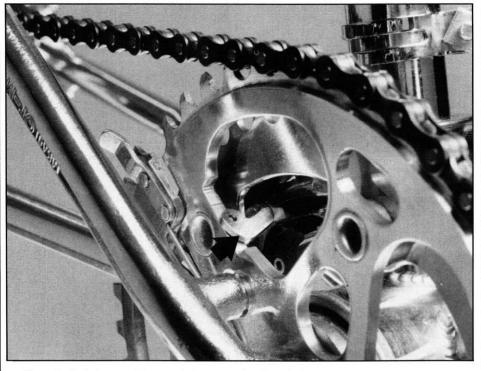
Chainring pawl (at arrow) shown passing through the control cams in the selector assembly.
